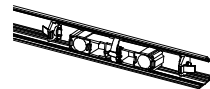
How To Change PCB unit Direction (for Left Edge Door)
